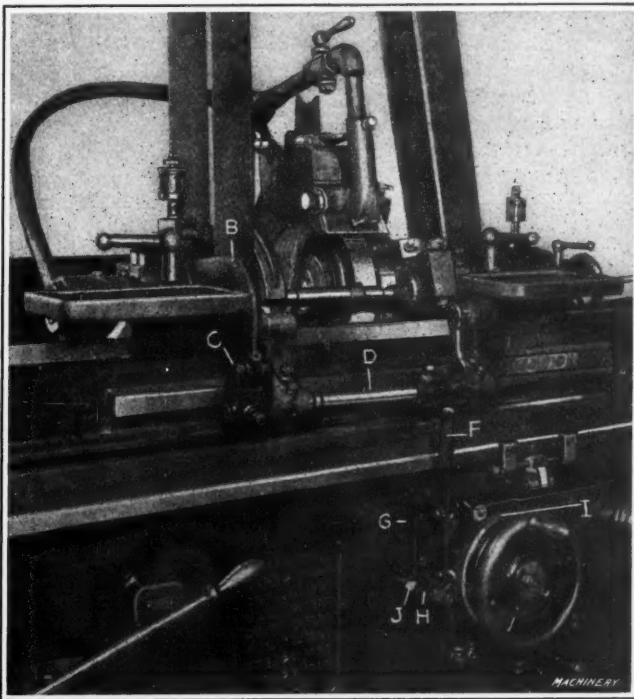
Brown & Sharpe Plain Grinding Machine equipped with Special Automatic In-feeding Device for Form Grinding
